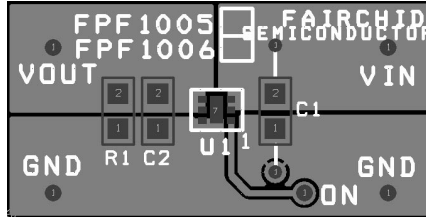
Demo board top and surface mount top layers view. (Pin 7 is connected to GND).
